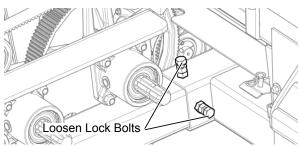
First Left Draper Drive Belt Lock Bolts
